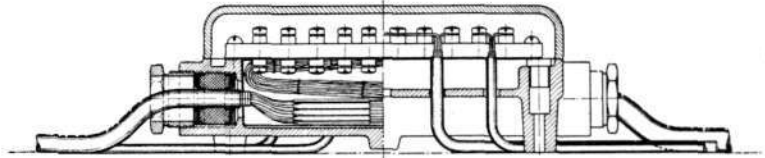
Section of box, Type ND 645/10. Left, joint between the incoming and outgoing cables; right, outgoing 1-pair cables.
